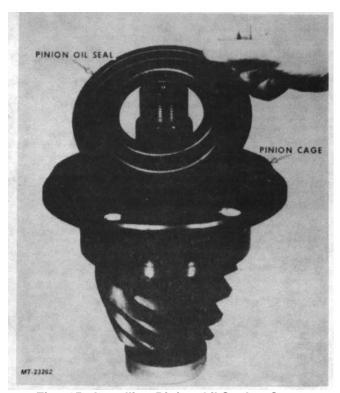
Installing Pinion Oil Seal to Cage IMPORTANT
